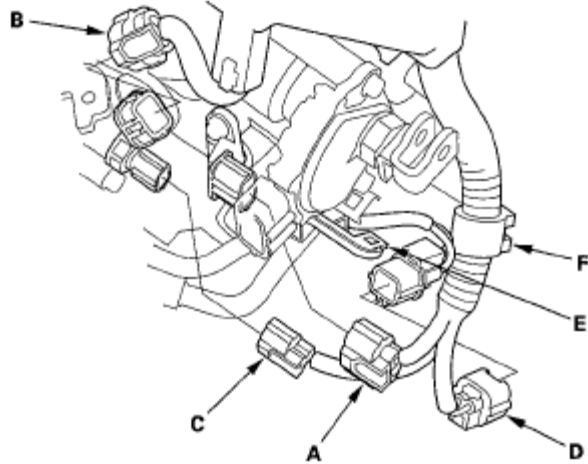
Identifying Input Shaft (Mainshaft) Speed Sensor Connector And 3rd Clutch Transmission Fluid Pressure Switch Connector
